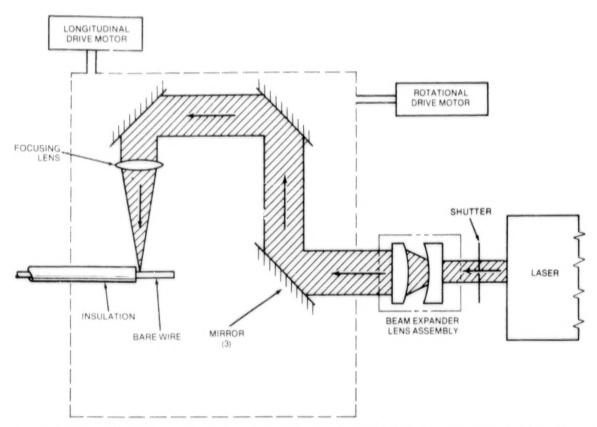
Schematic of CO₂ hand-held laser wire stripper shows path of 1-mm-diameter output beam from laser through a beam-expander lens assembly before entering rotating optical system.
